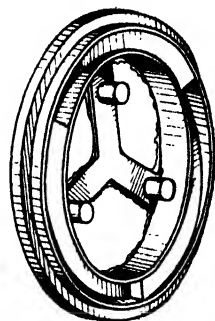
To avoid blemishes that ejector pins would make on this die casting if the pins were to bear on the faces of the piece, the die caster provided bosses, one projecting from each of the three runners through which metal enters the casting and in which the metal freezes, coming away from the die with the casting. An ejector pin bears on each boss and the runners with bosses are sheared off flush with the bore when flash is removed, leaving the casting unmarked by ejector pins.
